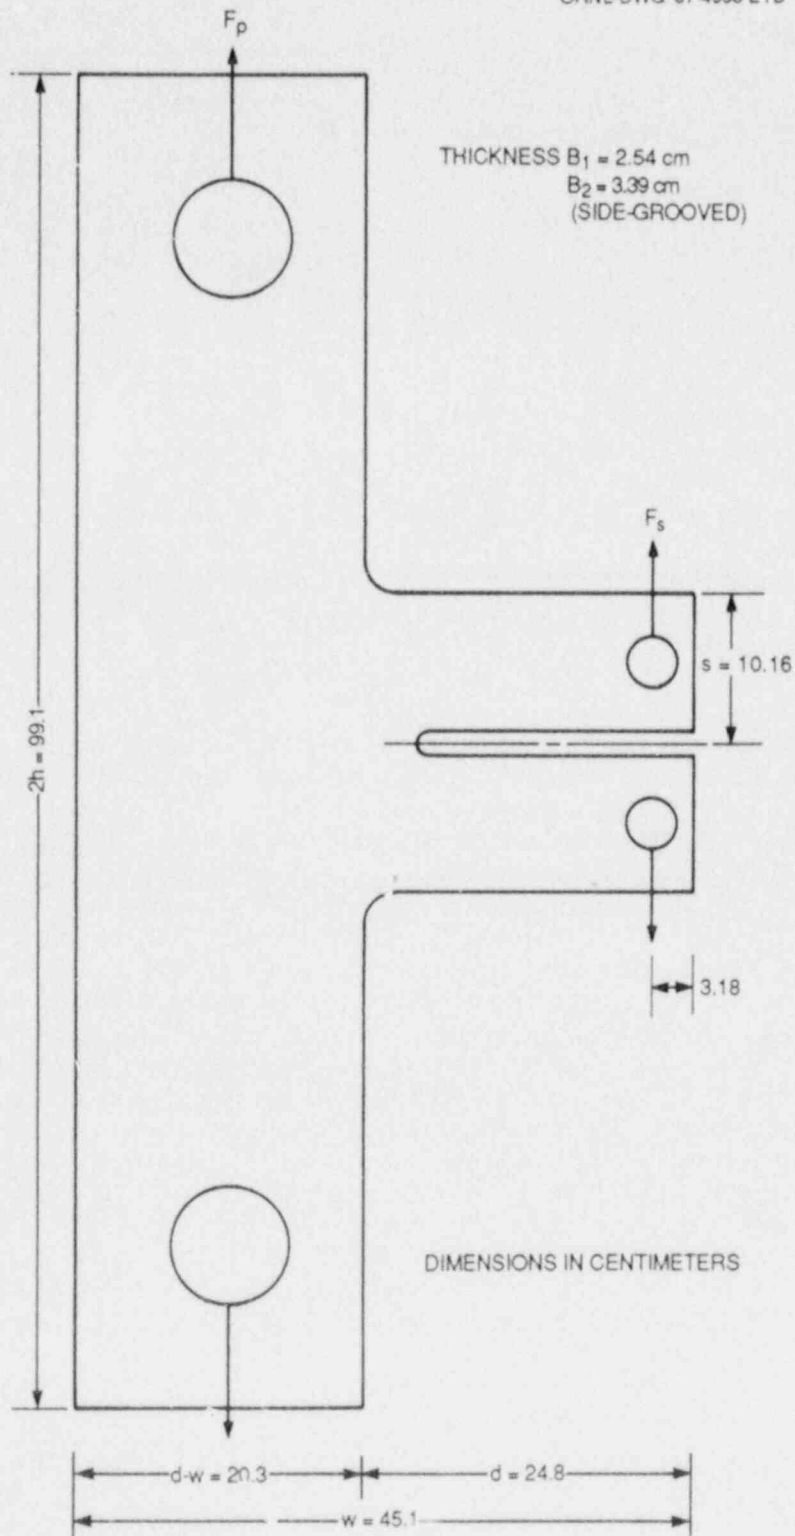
Geometry and loading system of stub-panel crack-arrest specimen.
